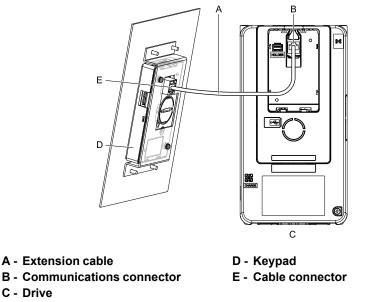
Connecting the Drive and Keypad with the Extension Cable
